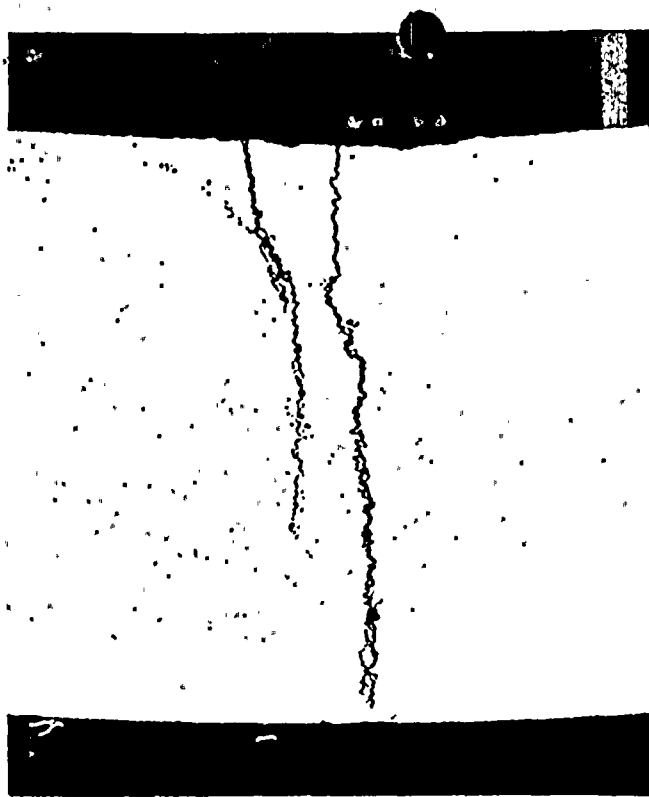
Section 5, Inside Surface Penetrant Examined.
